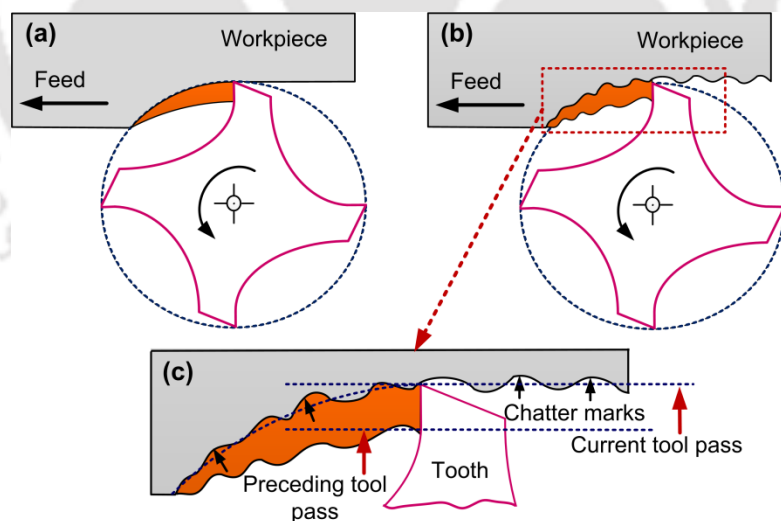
Influence of tool diameter on surface finish: (a) Ideal machining condition without chatter, (b) Machining with chatter
